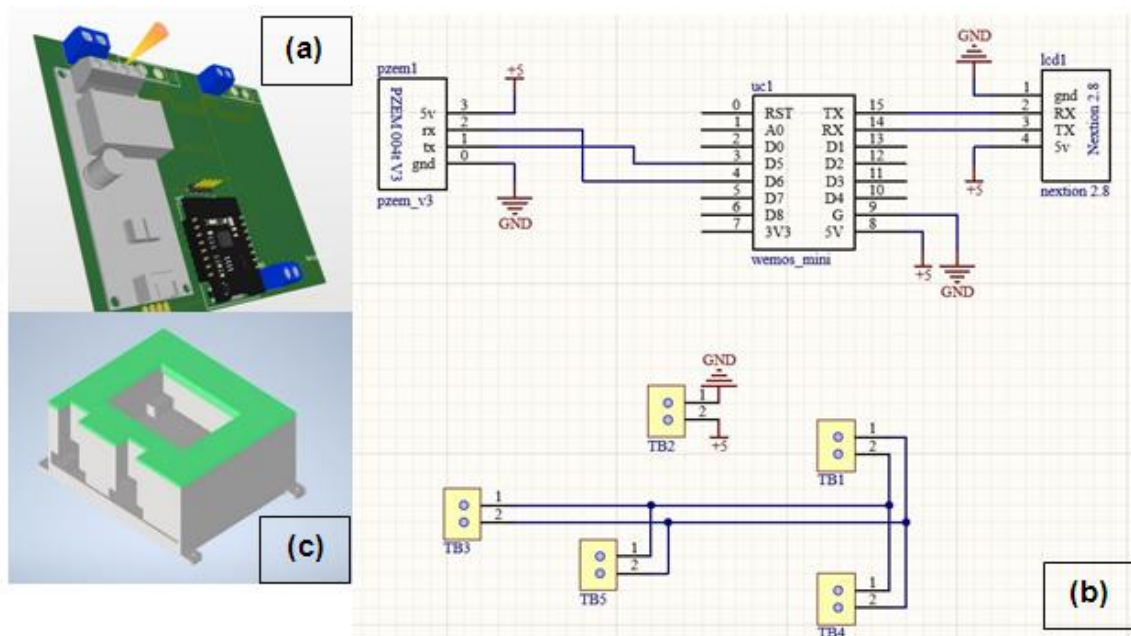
(a) P.C.B. Design; (b) Wiring Design, (c) Cashing design
